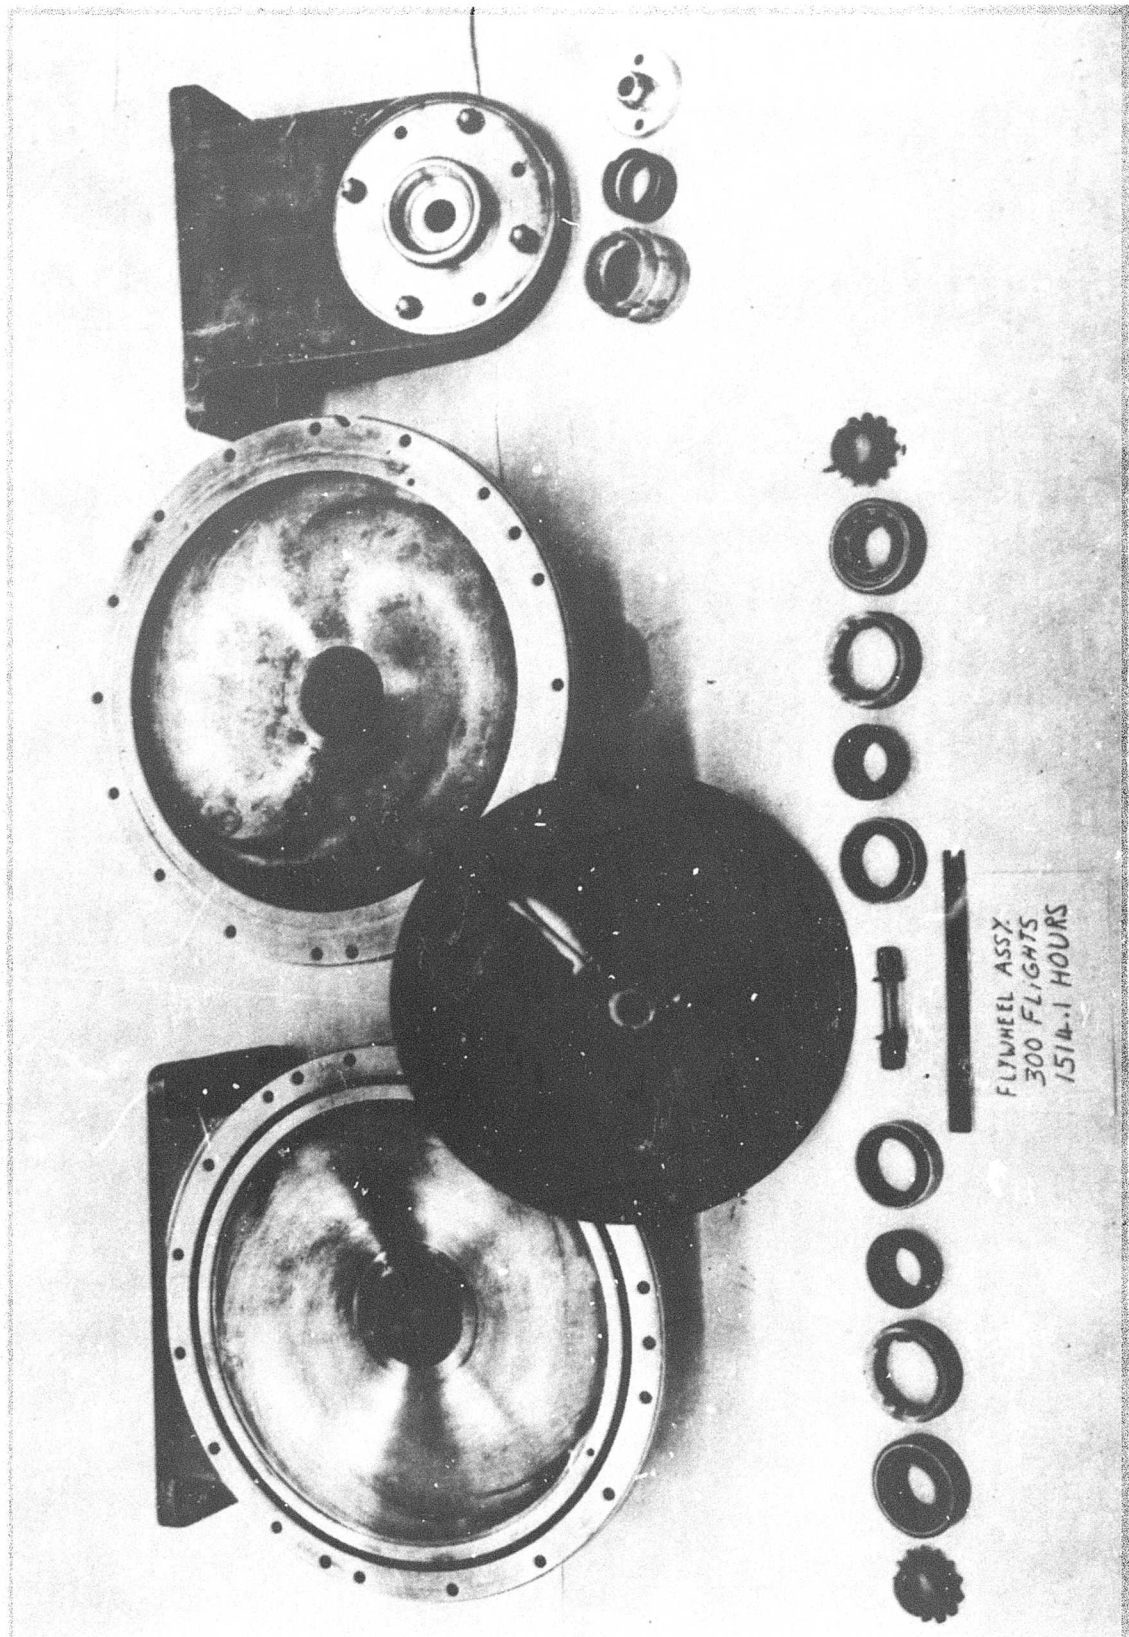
Continuous Duty Endurance Test Flywheel Assembly
